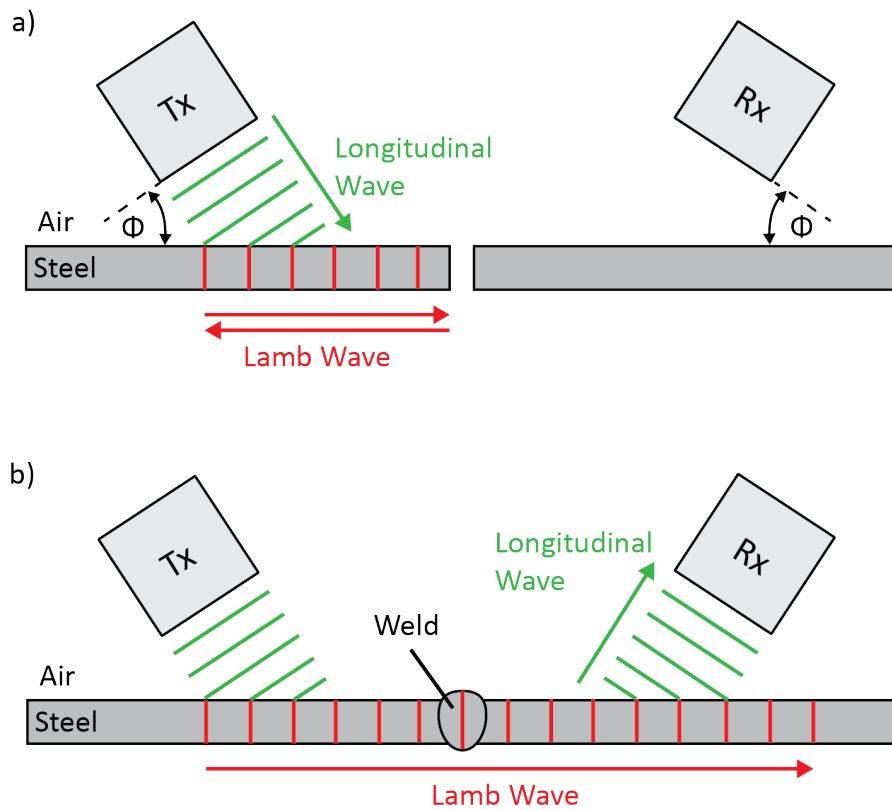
Side view schematic of a non-contact air-coupled ultrasonic inspection of thin plates using guided Lamb waves. a) Prior to welding the plates, the Lamb waves are internally reflected at the plate boundary; b) after welding the ultrasonic Lamb waves propagate through the welded joint and are transmitted to the receiving transducer.
